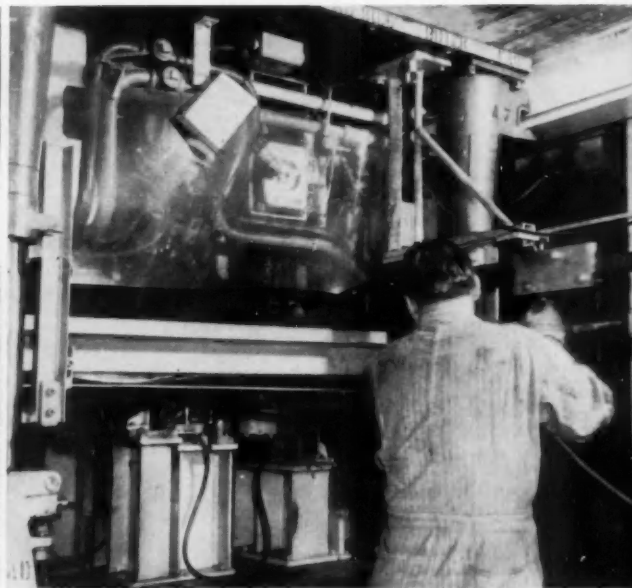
Using a special transverse loading device to place a trim pad retainer in position inside a welding die, yet keeping the operator's hands well away from the die.
